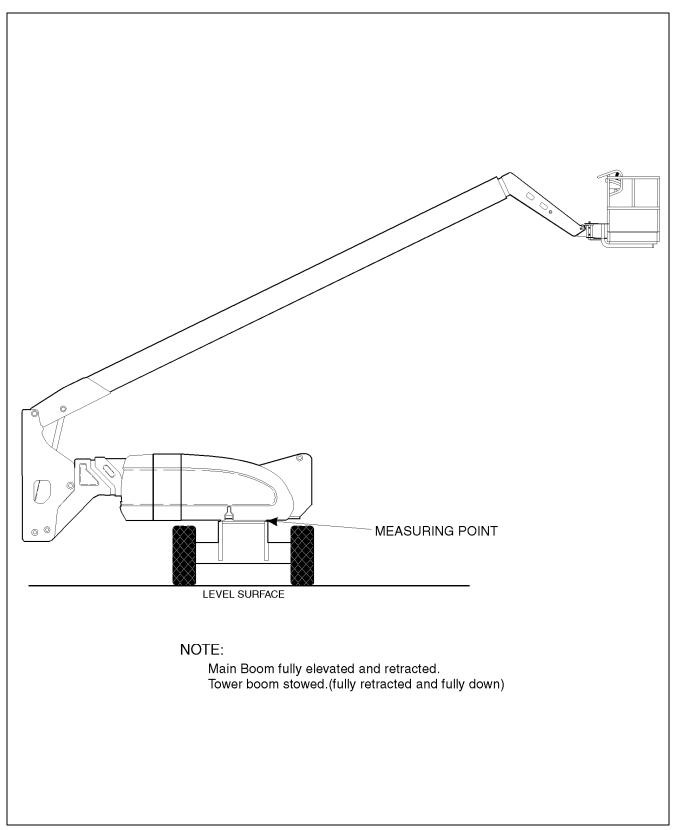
Swing Bearing Tolerance Boom Placement (Sheet 1 of 2)
